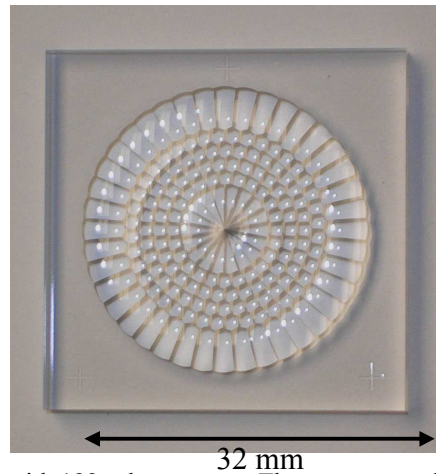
Plastic mold lenslet array with 188 sub-apertures. The copper metal mold is manufactured by diamond turning machine. The typical spacing between each lenslet is 1.2 mm.
